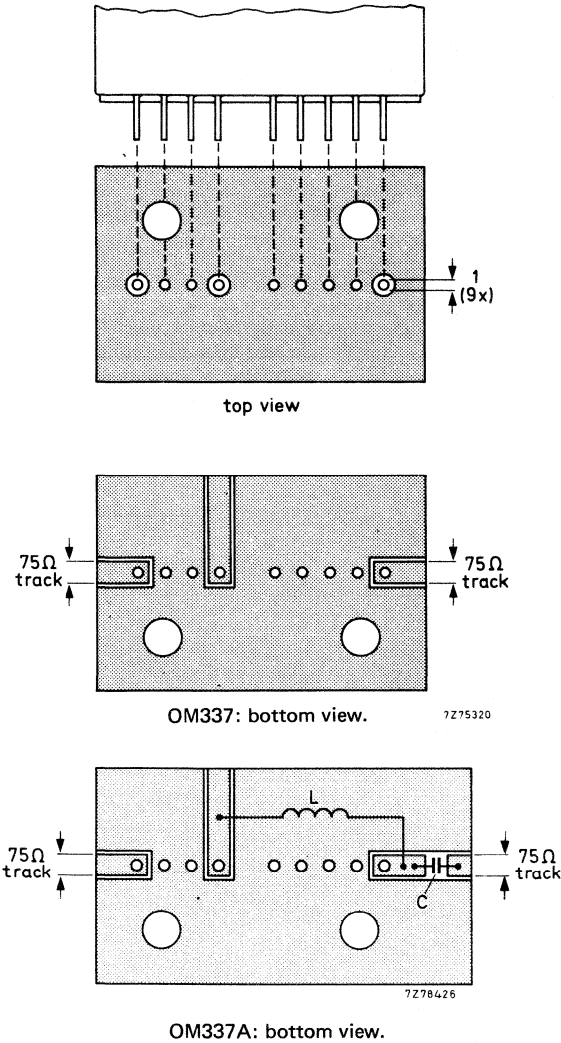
Printed-circuit board holes and tracks for the OM337 and OM337A.
